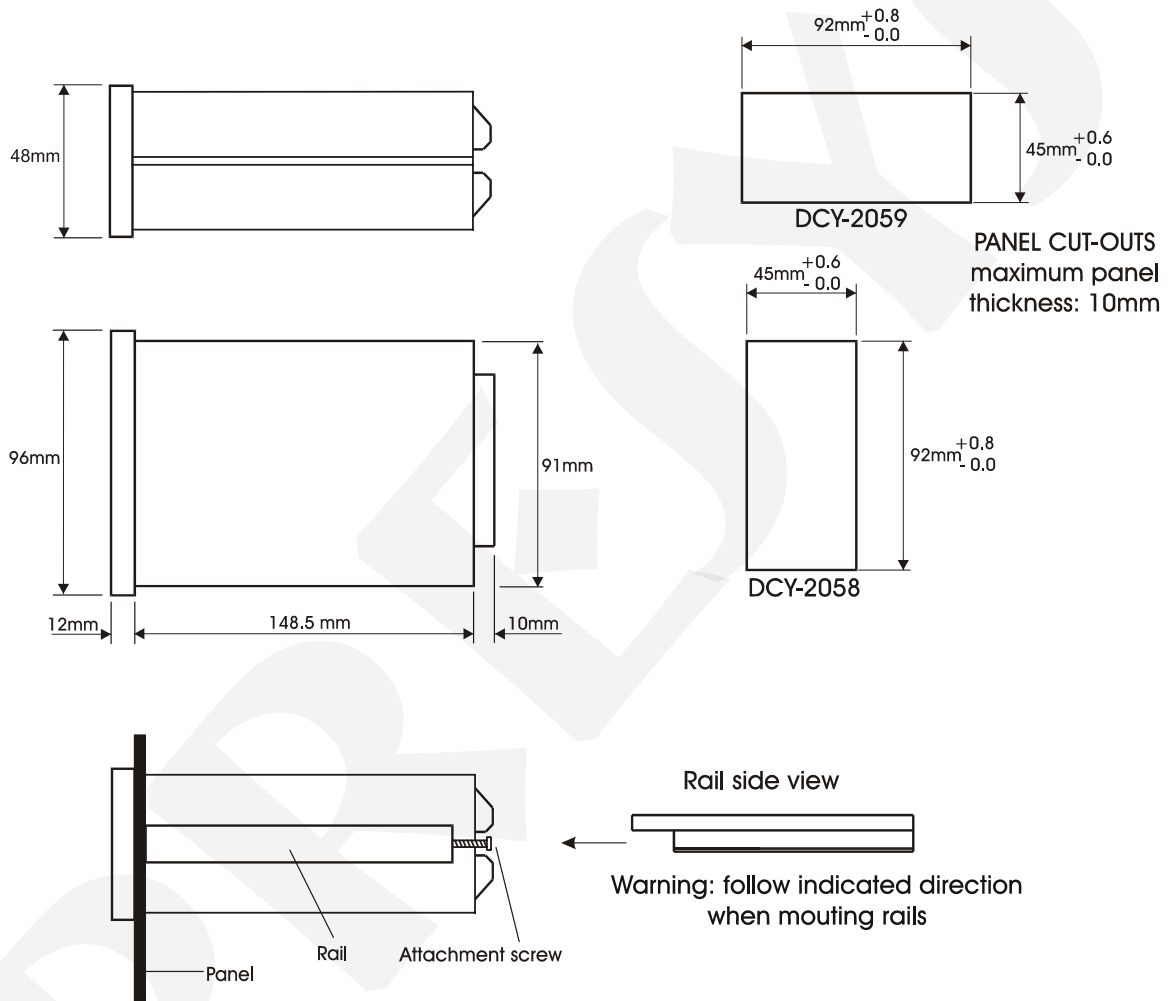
Dimensional drawing, panel mounting cutout and side view
